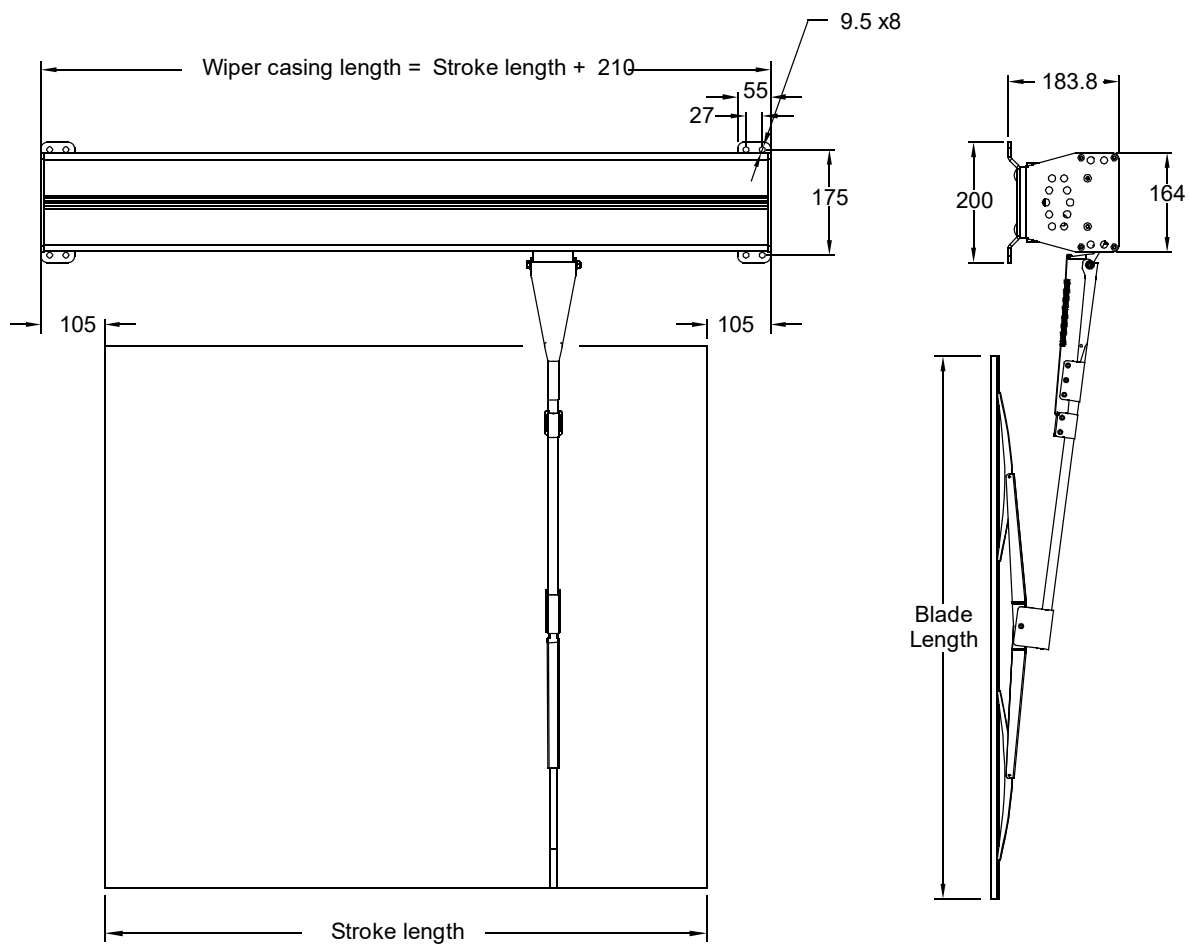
Wiper Unit Dimensions (all measurements in mm)
